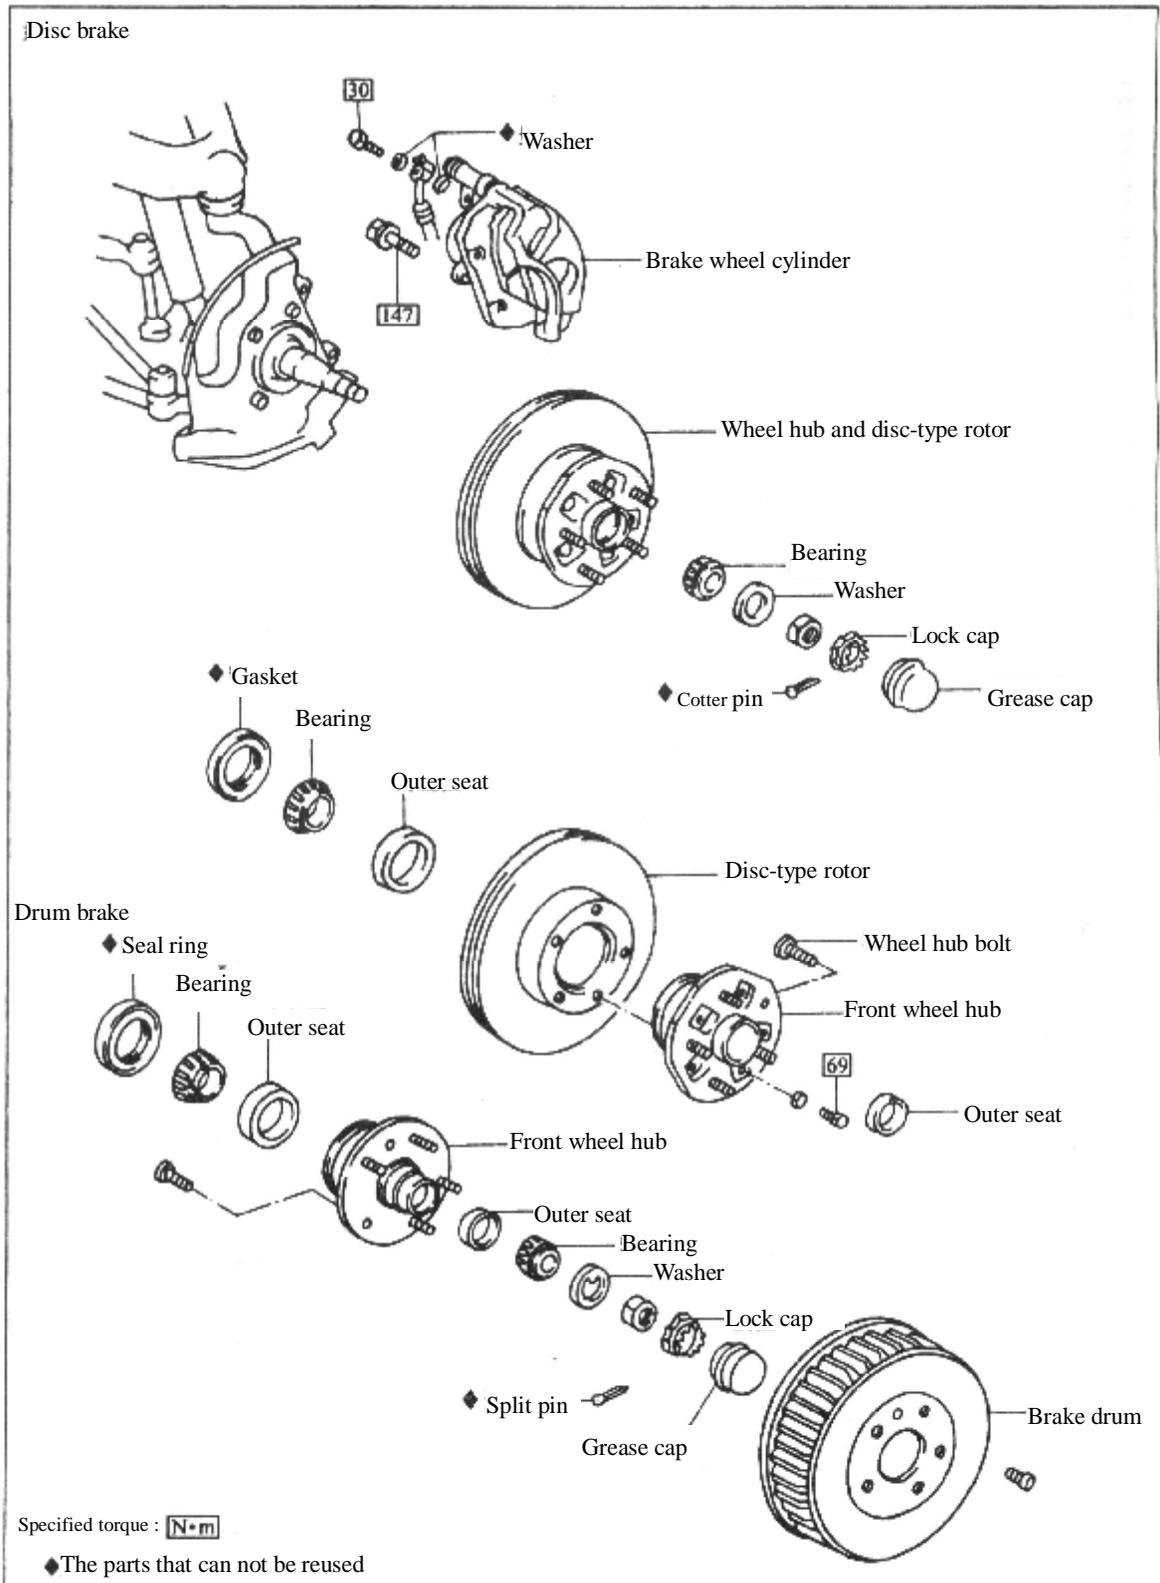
Decomposing View of Front Wheel Hub Assembly
